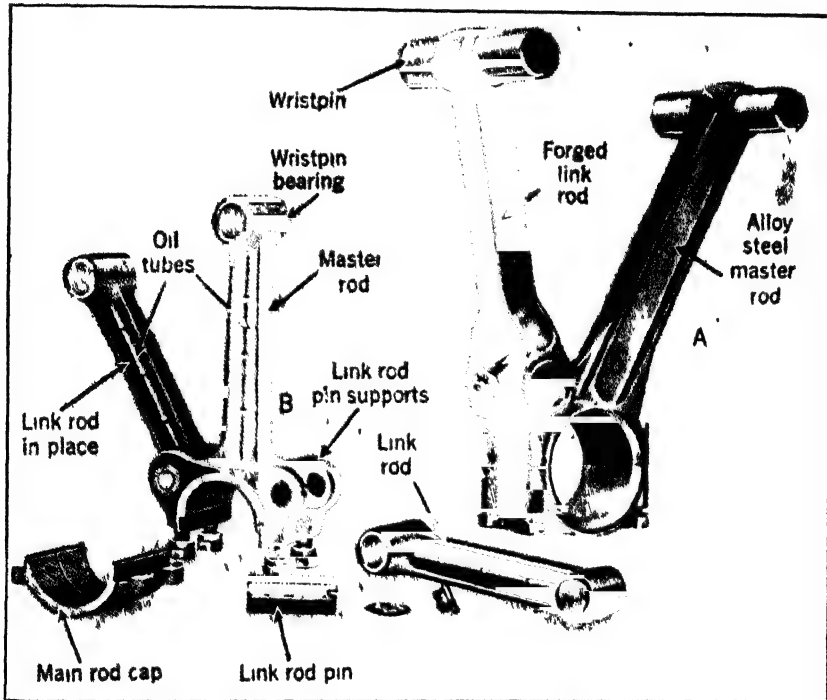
Illustration Showing Master and Link Rod Assembly of Good Modern Design. A—Connecting Rod Assembly Used on Fiat A20 "Vee" Engine. B—Master Connecting Rod and Two Link Rods Employed on Napier-Lion W Type Engine.
